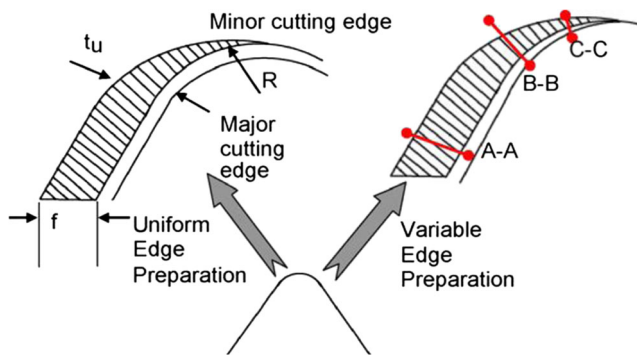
Uniform and variable micro-geometry of cutting edge [101]
